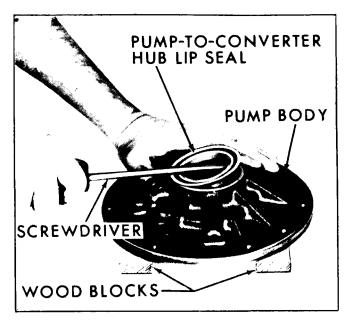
G-83 Removing Pump Body Lip Oil Seal
